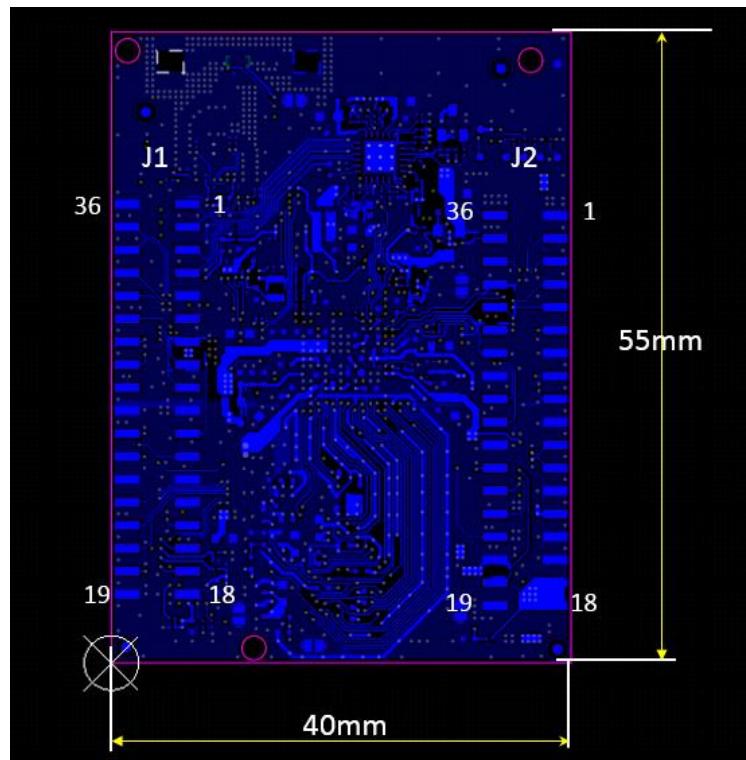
LS10 Top View - Mechanical Dimension 1
